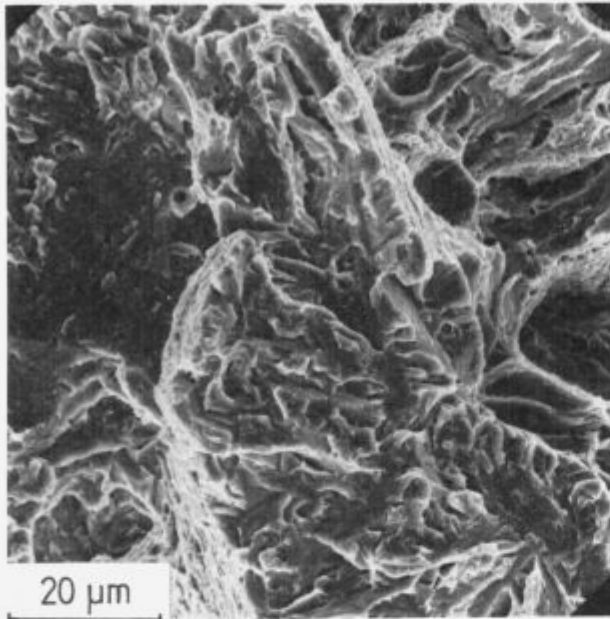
Fracture surface by a notch toughness of 35 J.
